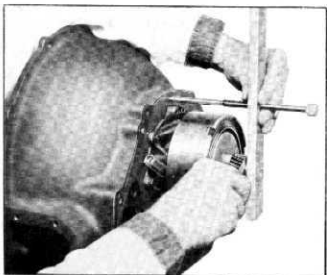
Checking for Proper Low to Reverse Sun Gear Clearance
